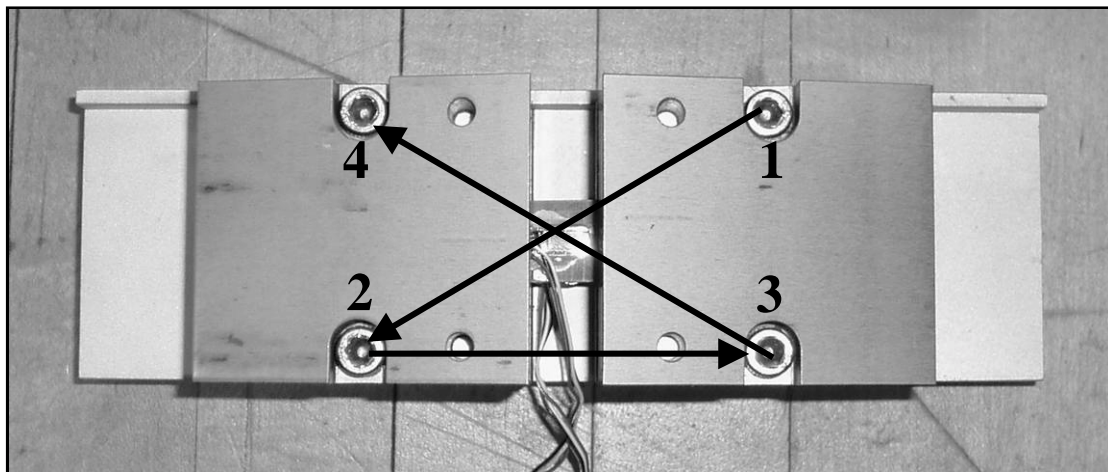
Specimen Gripped and Ready with Tighten Pattern
